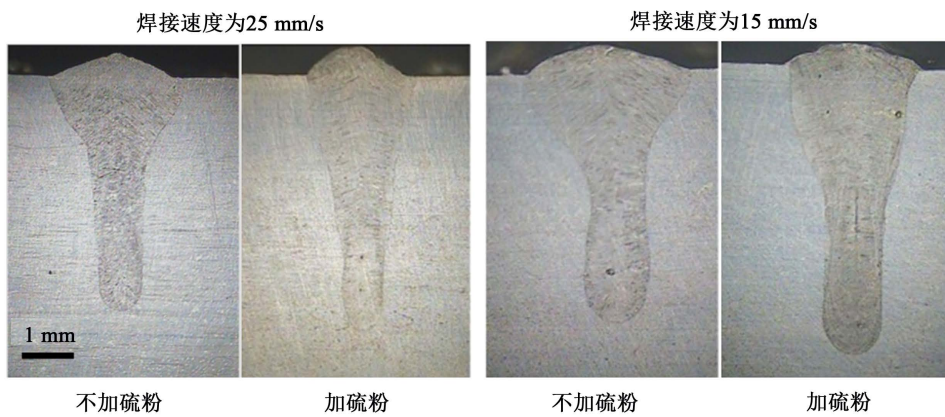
Effects of sulfur powder on weld bead at different welding speed
